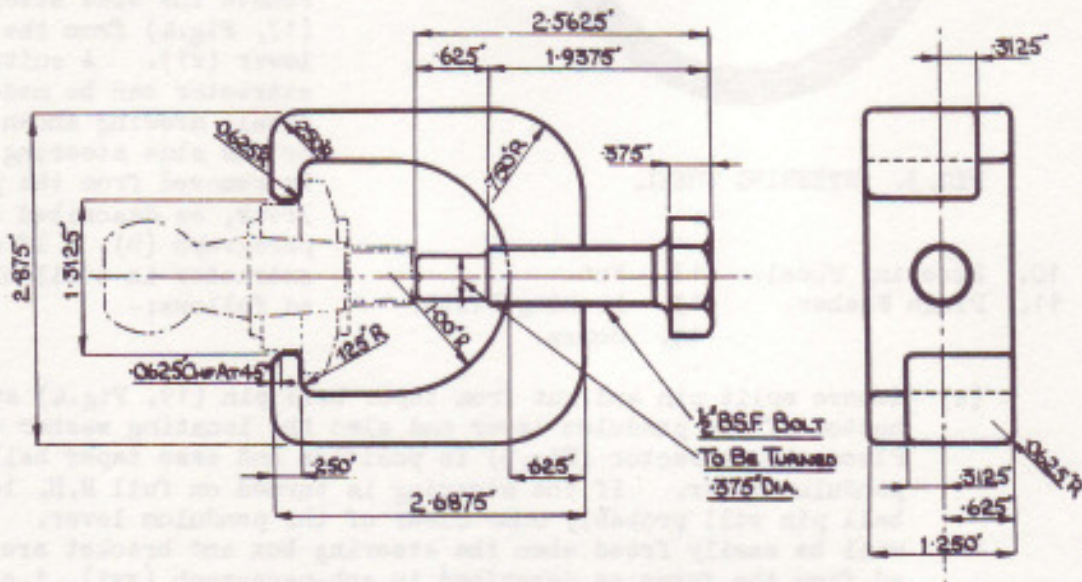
DETAILS OF EXTRACTOR - PENDULUM LEVER BALL PIN.
